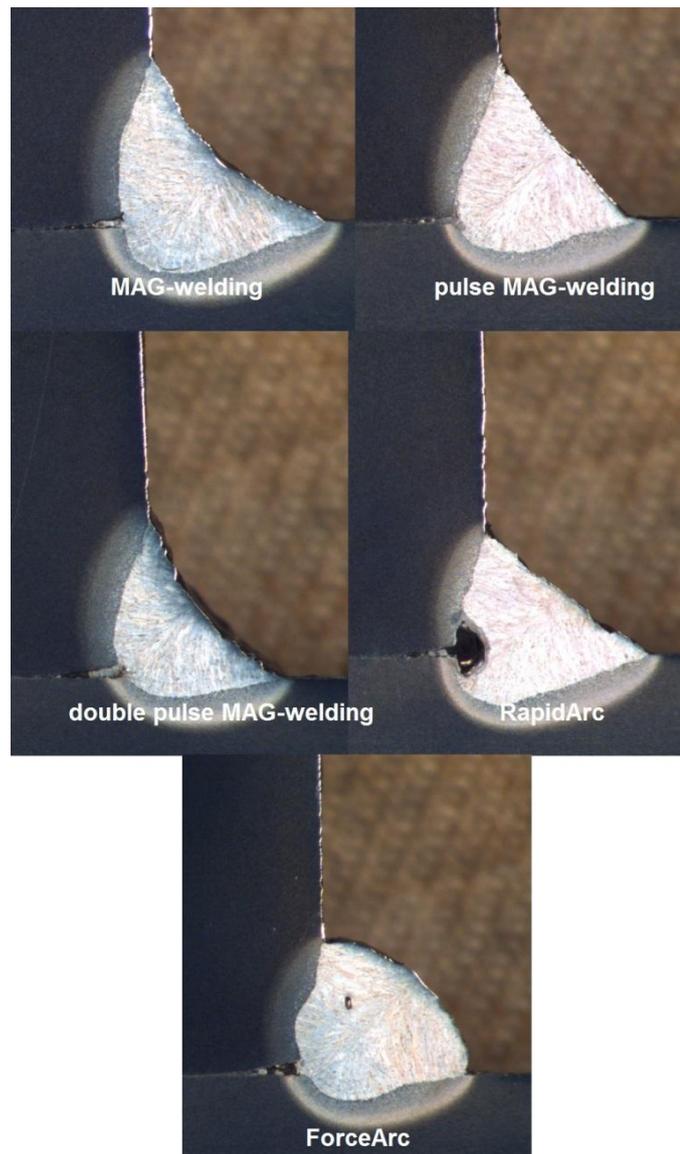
Macrographs of welds in welding position PG with throat thickness of 4 mm.
